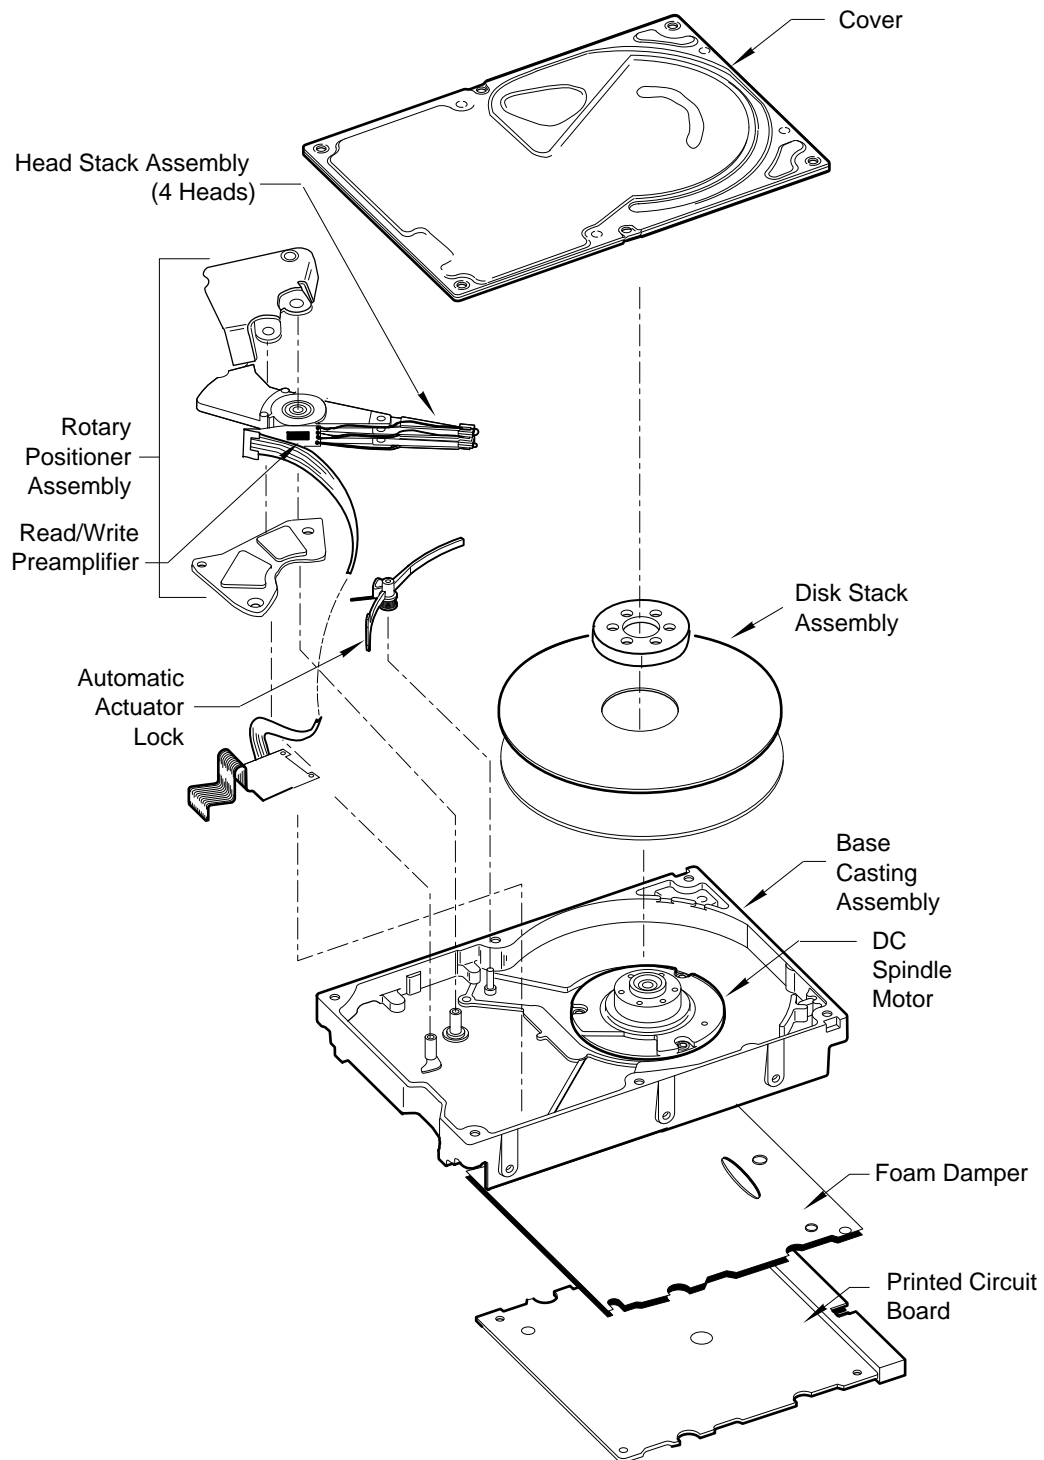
Quantum Fireball TM (Two-Disk) Drive Exploded View
